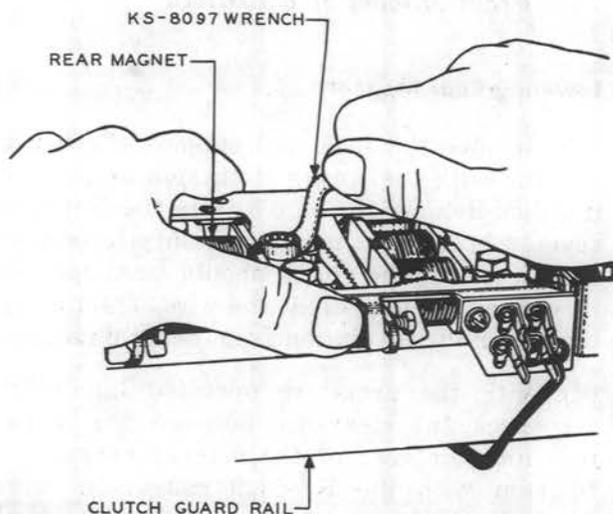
Method of Loosening Rear Magnet Clamping Screw
